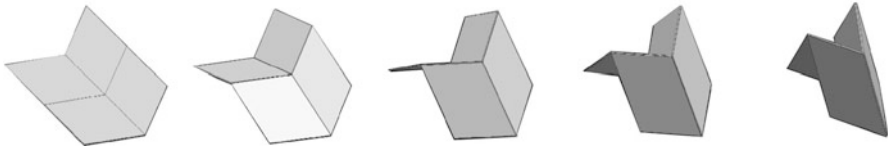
Illustration of folding scheme to convert flat sheet into three-dimensional foldcore
